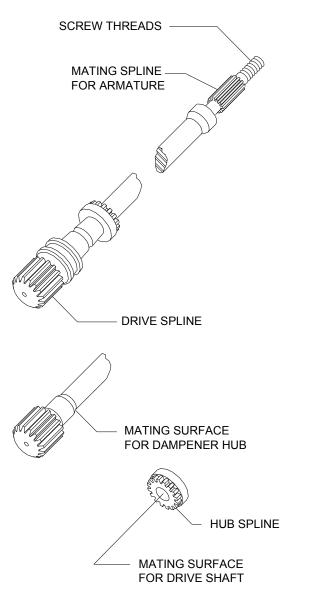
Inspecting Drive Shaft and Dampener Hub
